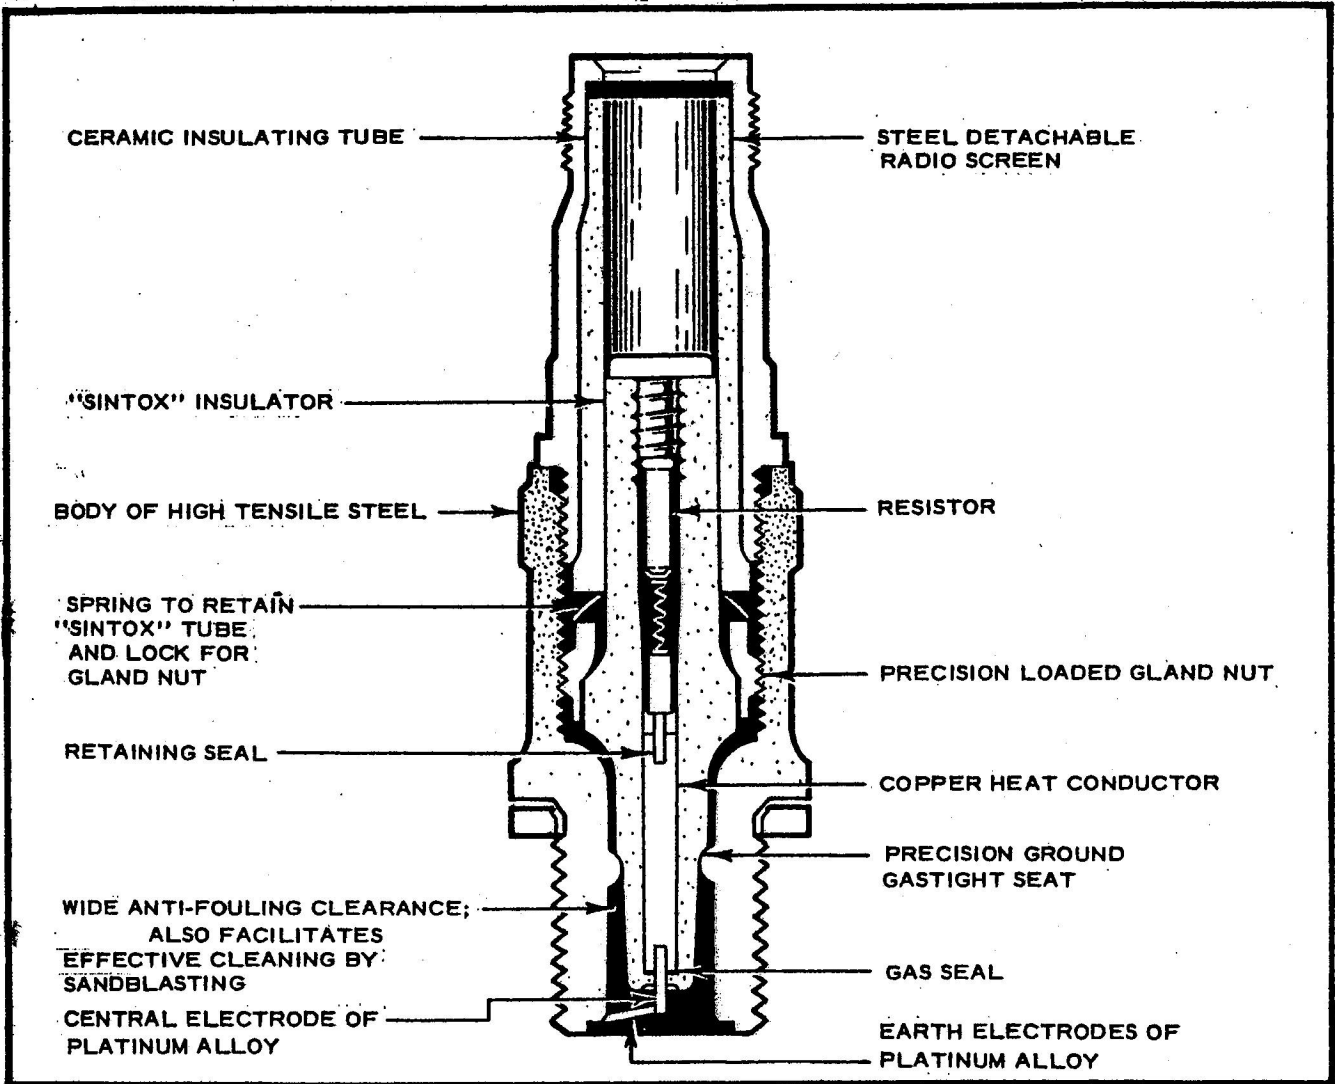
Sectional View of Lodge Type RS19/2RS Spark Plug
